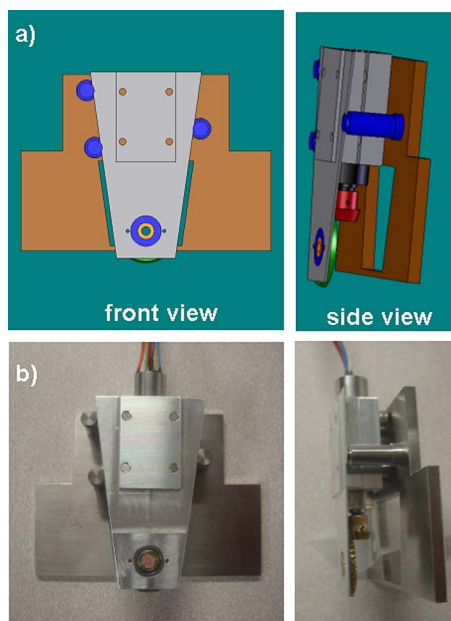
(a) Design of the motorized azimuthal rotation sample holder [design and figure using 3D solid designer (Ref. 16)]. (b) Pictures of the device mounted in the three-pin kinematic mount.
